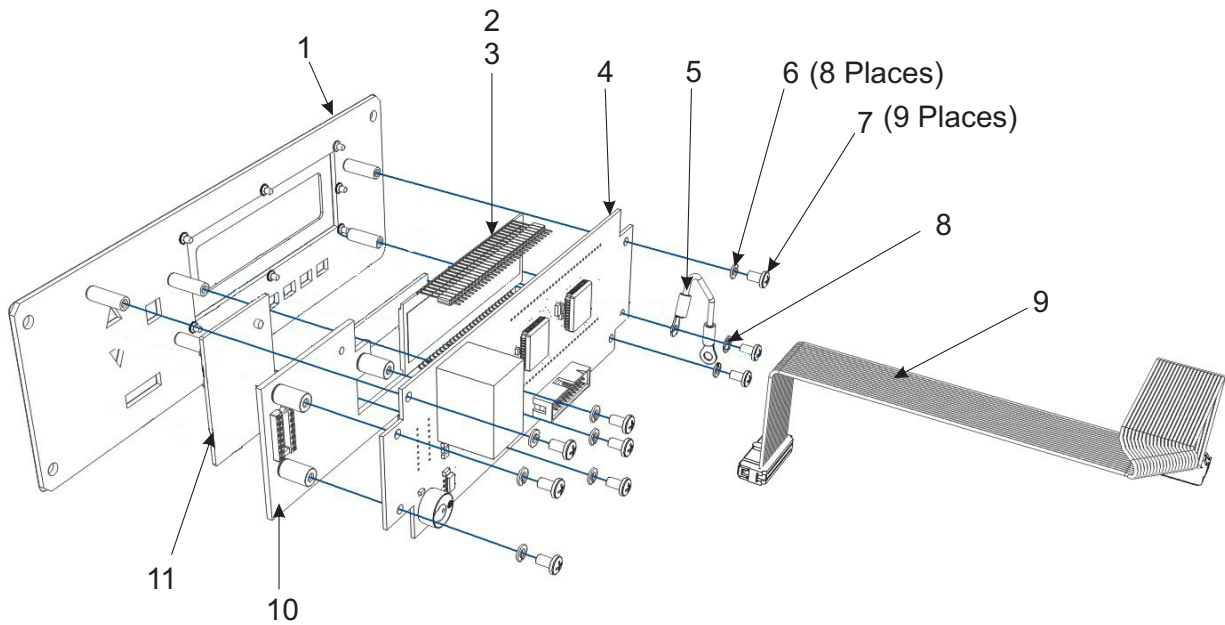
4421 RF Power Meter, Front Panel Assembly
